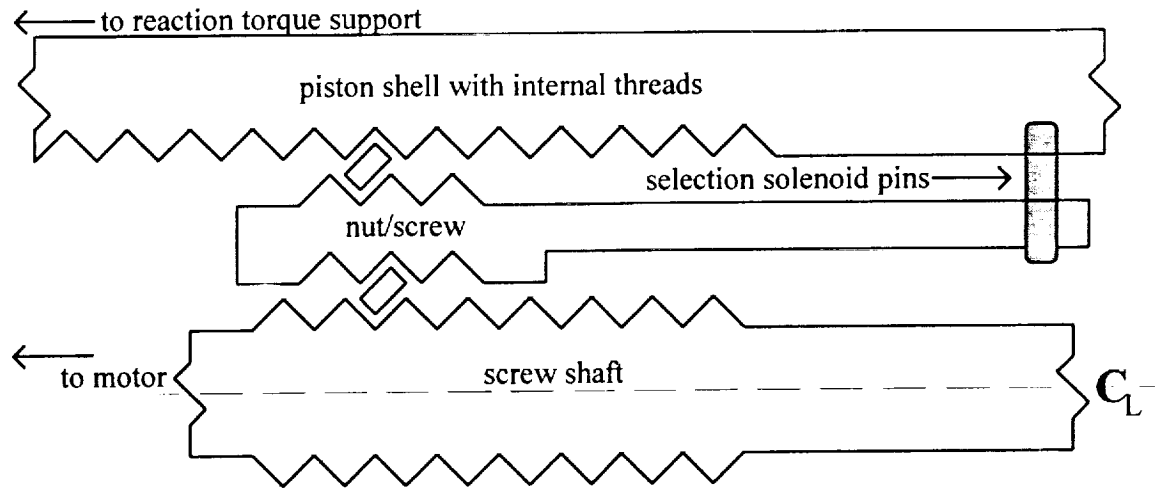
Dual Nut & Screw Design for Redundant Screw.
